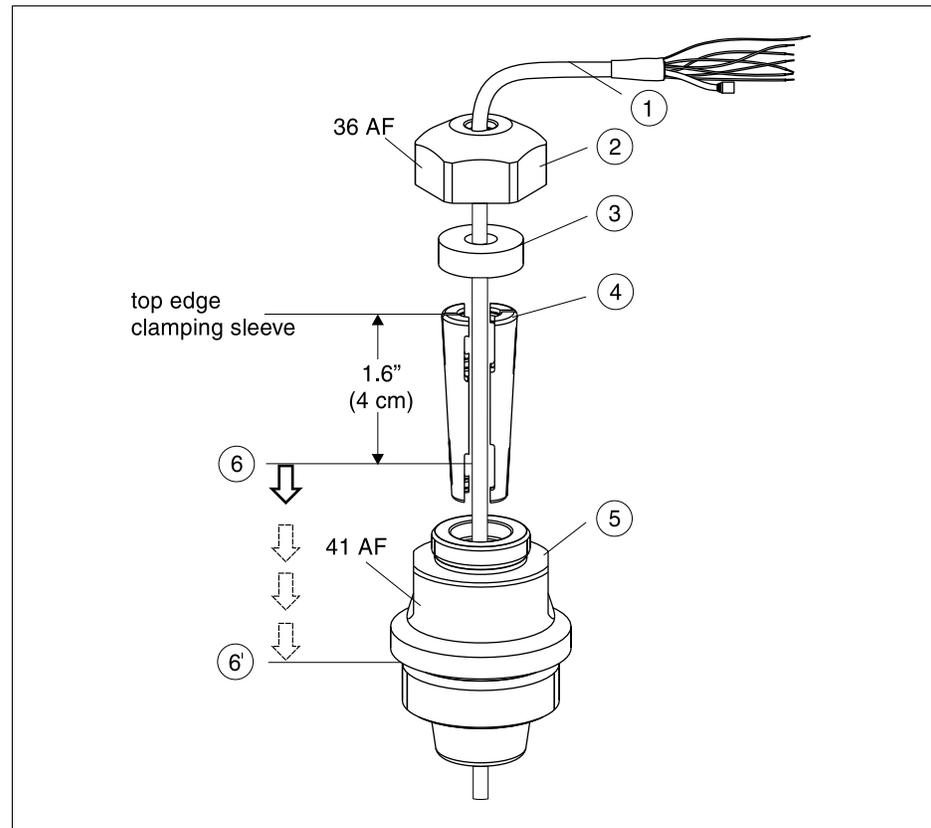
Installing the Waterpilot FMX 167 with cable mounting screw, depicted here with G 1 1/2 thread
